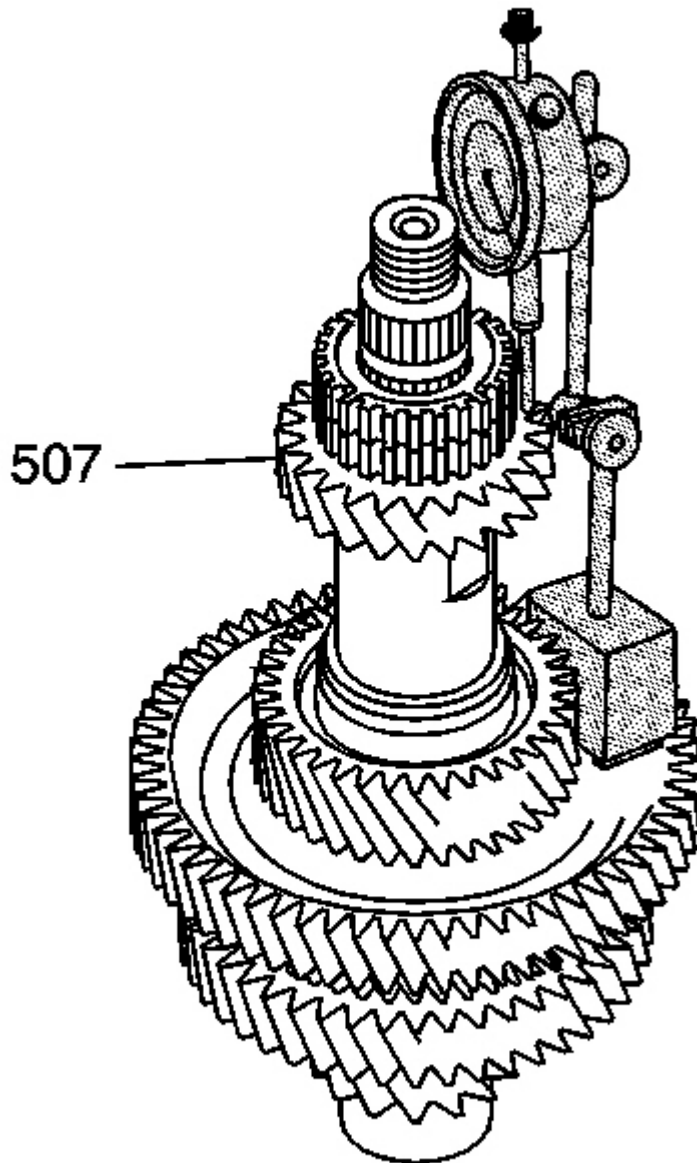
Measuring The 5th Driven Gear Axial Clearance
